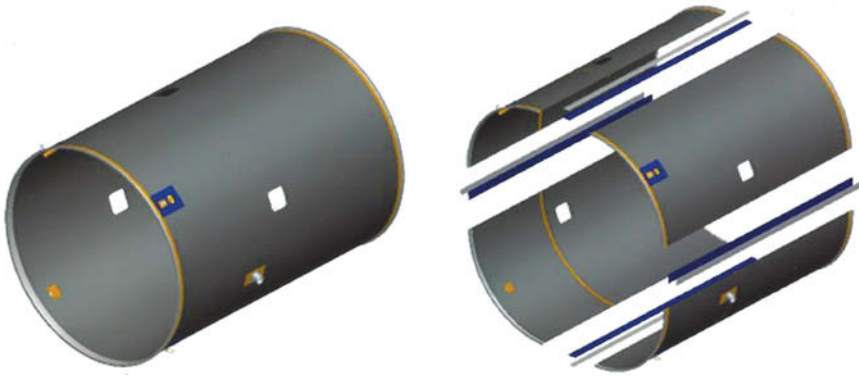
“Implosion” of a segmented composite barrel into a single unified piece.
